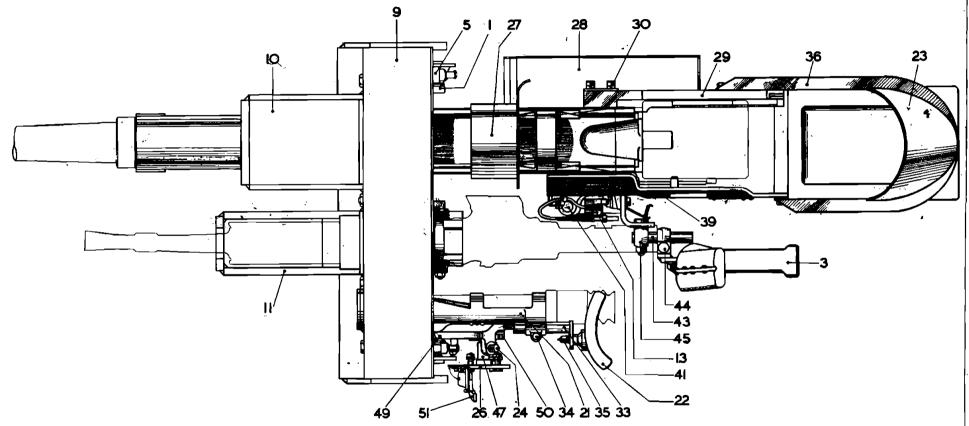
Mounting 37 m/m and Med. Besa No. 1, Mark I. Plan
